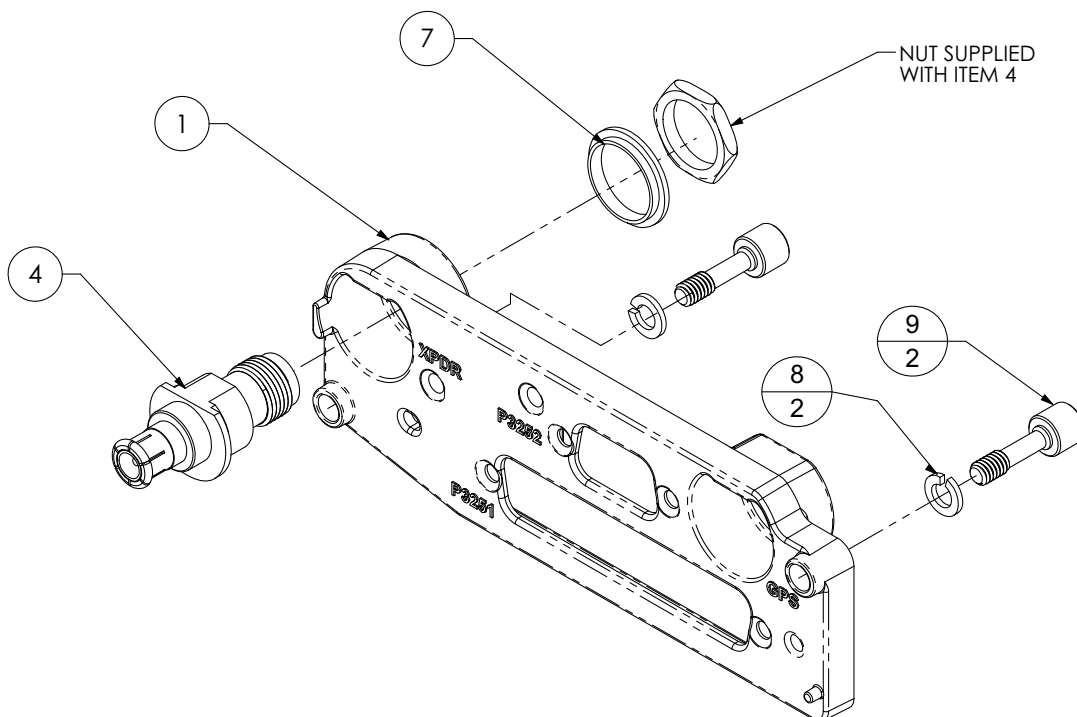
GTX 3X5 Vertical Mount with TNC XPDR Back Plate Assembly (P/N 011-02976-12)
